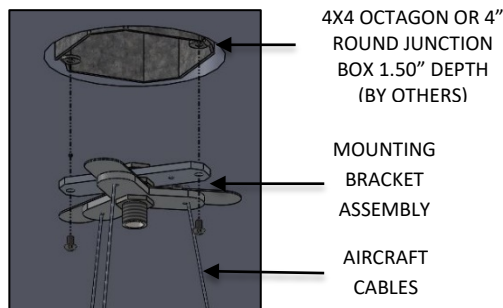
MOUNTING BRACKET ASSEMBLY
